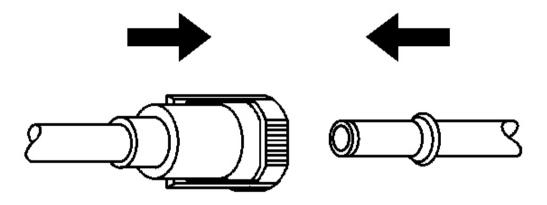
Connecting Fitting Of Retainer Courtesy of GENERAL MOTORS CORP.
